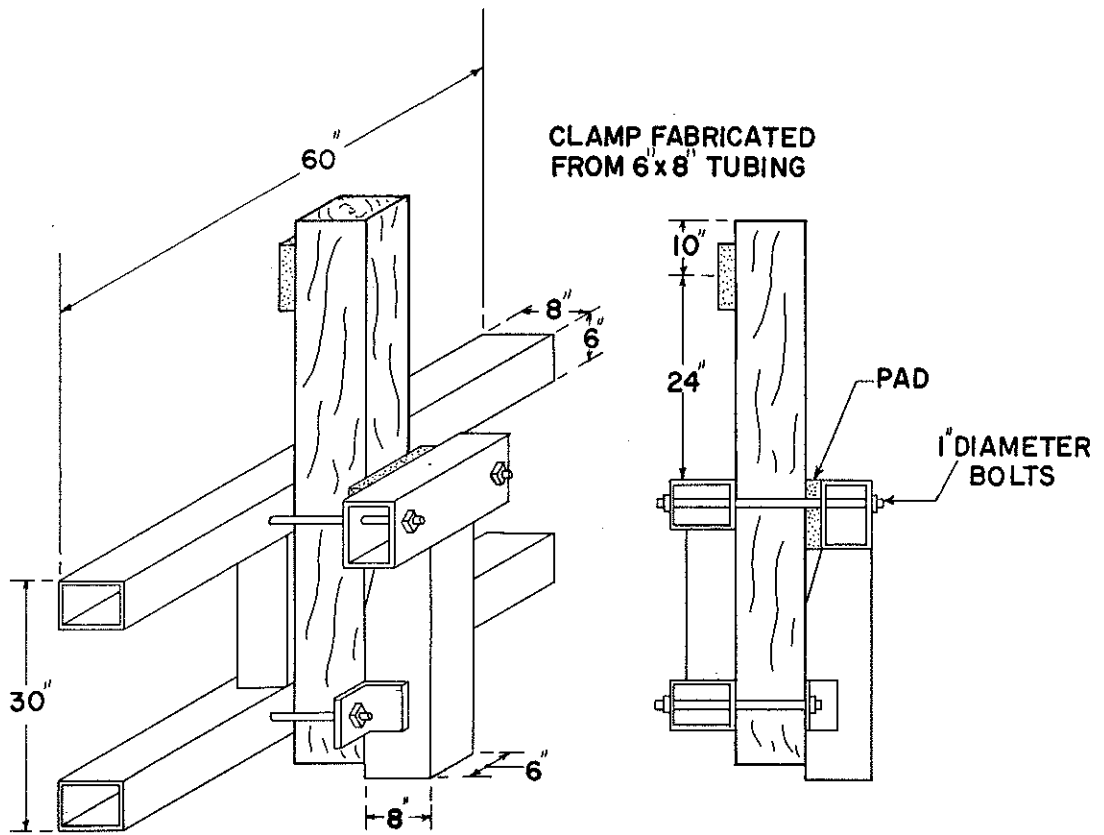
CONSTRUCTION DETAILS OF THE POST HOLDER
